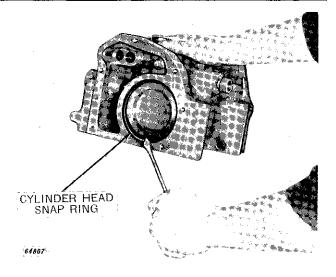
Removing Cylinder Head Snap Ring
